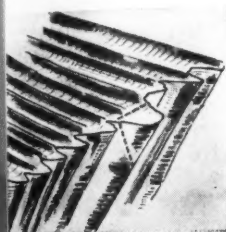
A cutting edge as ordinarily ground would show "hills" and "valleys" like this under high magnification.
